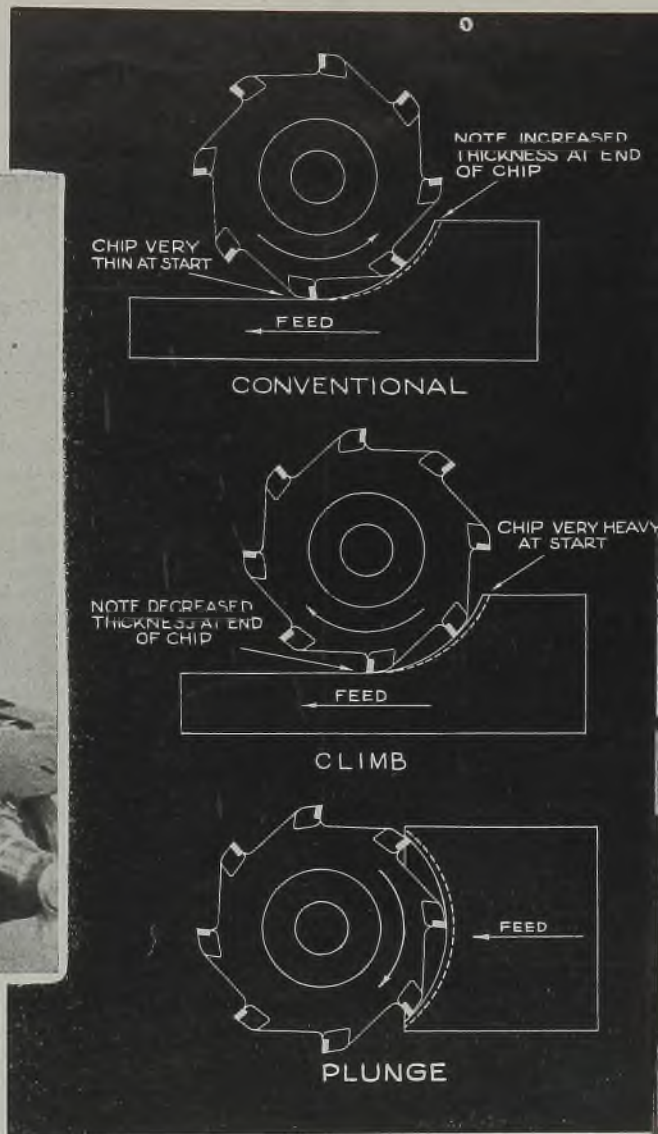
(Center, right)—Climb cuts often are practical with present equipment either because of lack of rigidity or presence of feed screw end play in machines not built for milling with carbides
